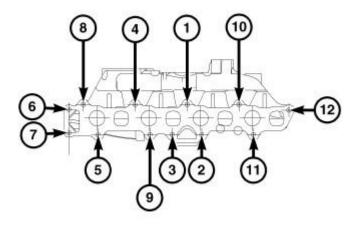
Intake Manifold & Thermostat Housing Courtesy of CHRYSLER LLC
